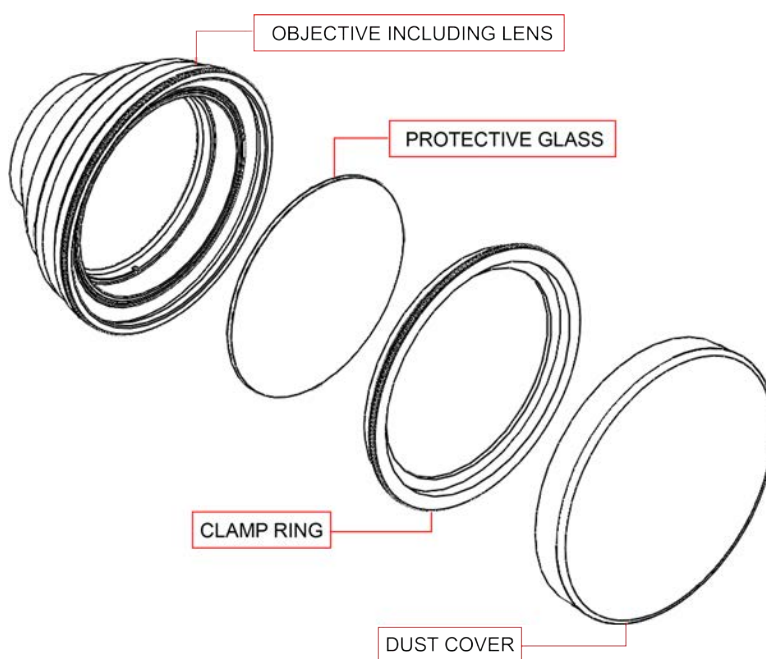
Example of F-Theta Lens (Complete Assembly)
